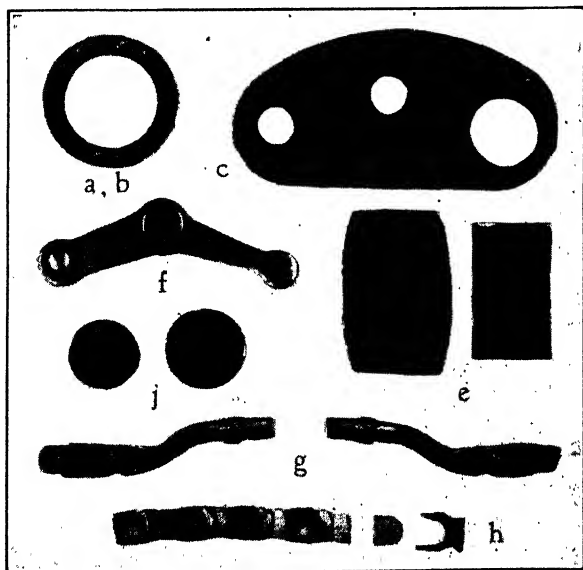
The cold forging or "extrusion" of rivet lugs and similar operations.
